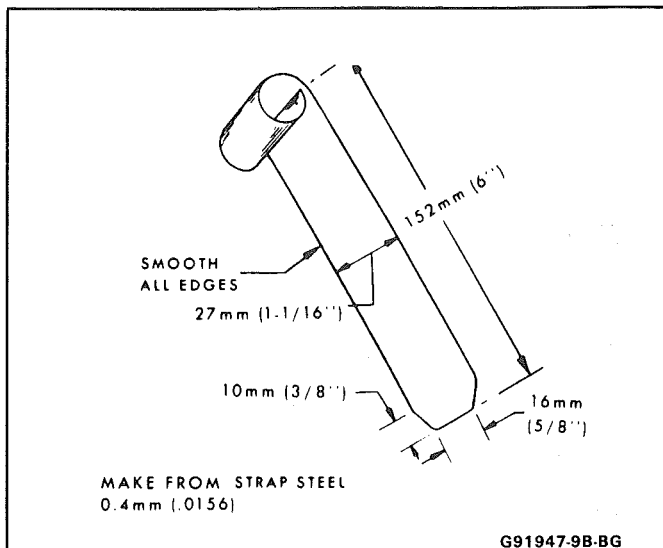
Head Restraint Antiremoval Lock Releasing Tool
